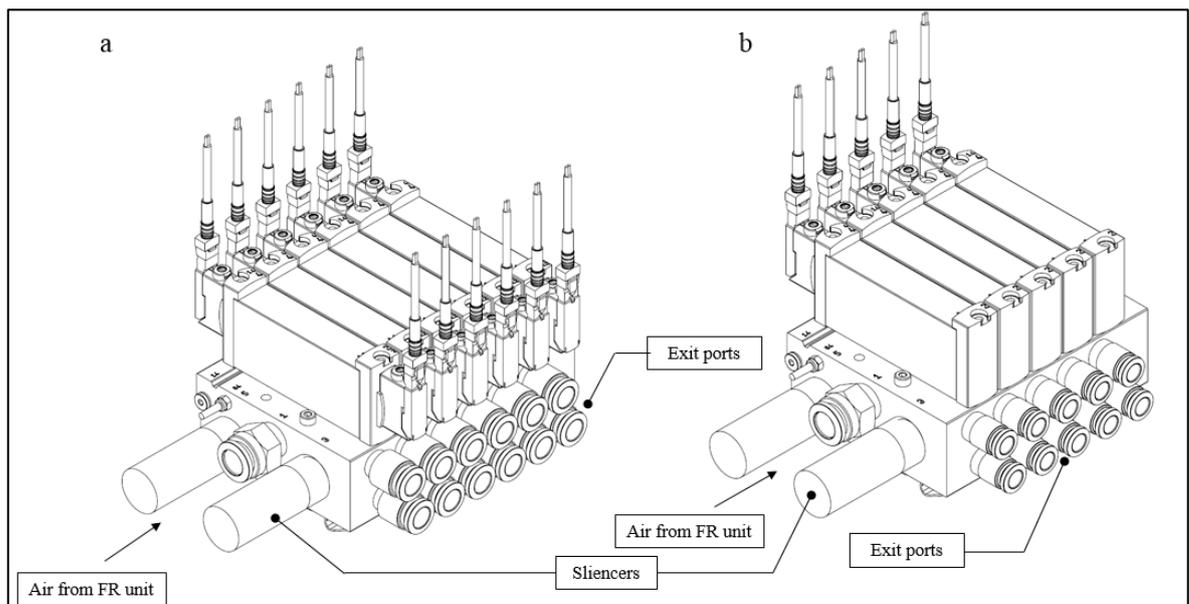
a) 5/2 DCV manifold assembly & b) 3/2 DCV manifold assembly (Festo 2016j, p. 1).
